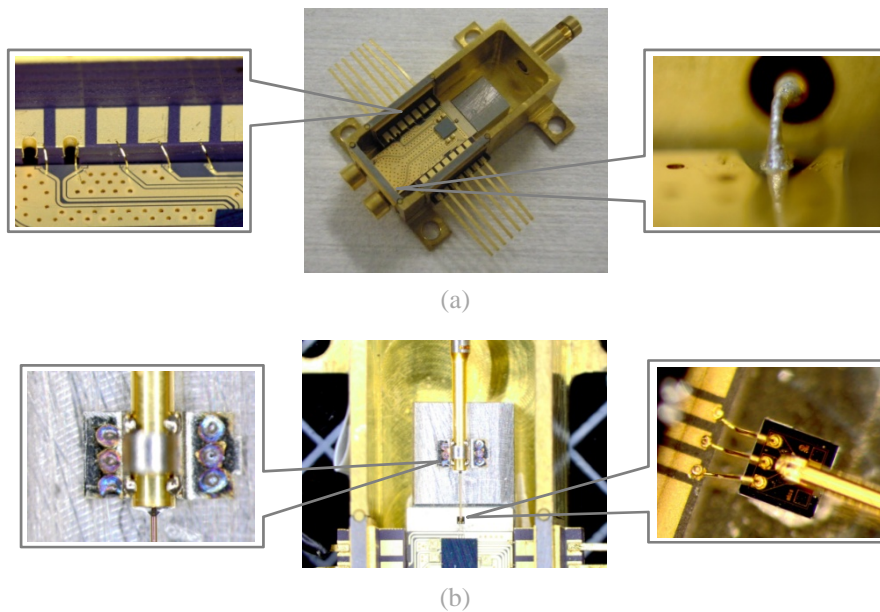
LBM Rx packaging process: ribbon bonded package and GPPO connection to CPWs (a), and fibre alignment and welding (b).
